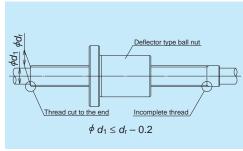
Shaft end of a deflector recirculation system ball screw
